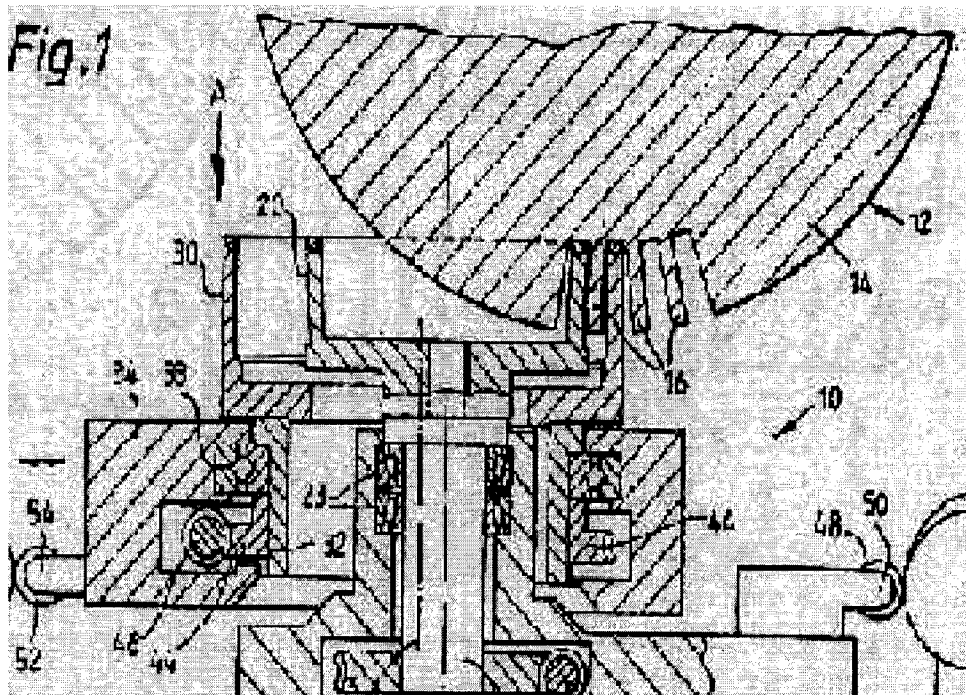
Representation of the system tool-workpiece for producing an integrally bladed rotor with two annular cutters [Hunt, 1994]
